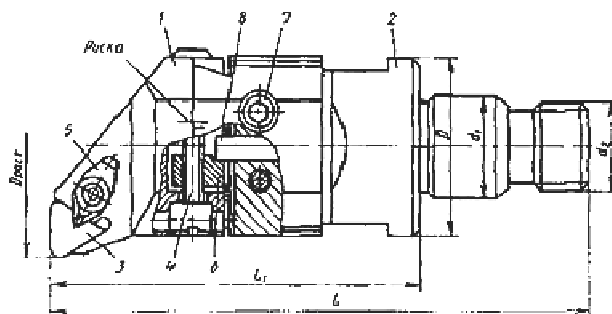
Single-tooth boring head for boring holes with a diameter of 30 ... 150 mm
